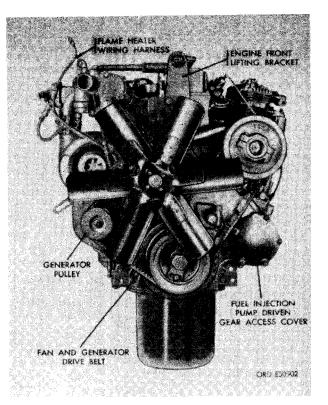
LATE MODEL LDS -427-2 ENGINE ASSEMBLY - FRONT VIEW.
